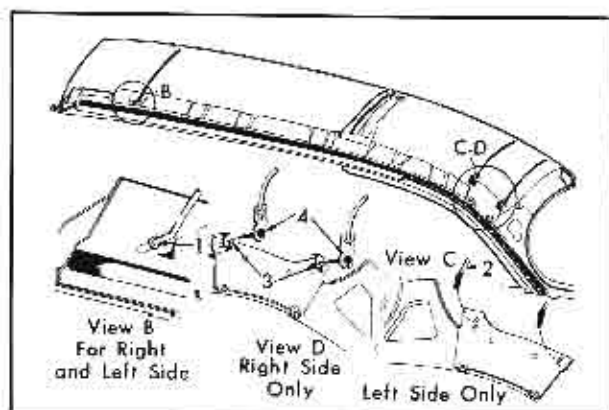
Removing Headlining Support Wire (6237DX)
